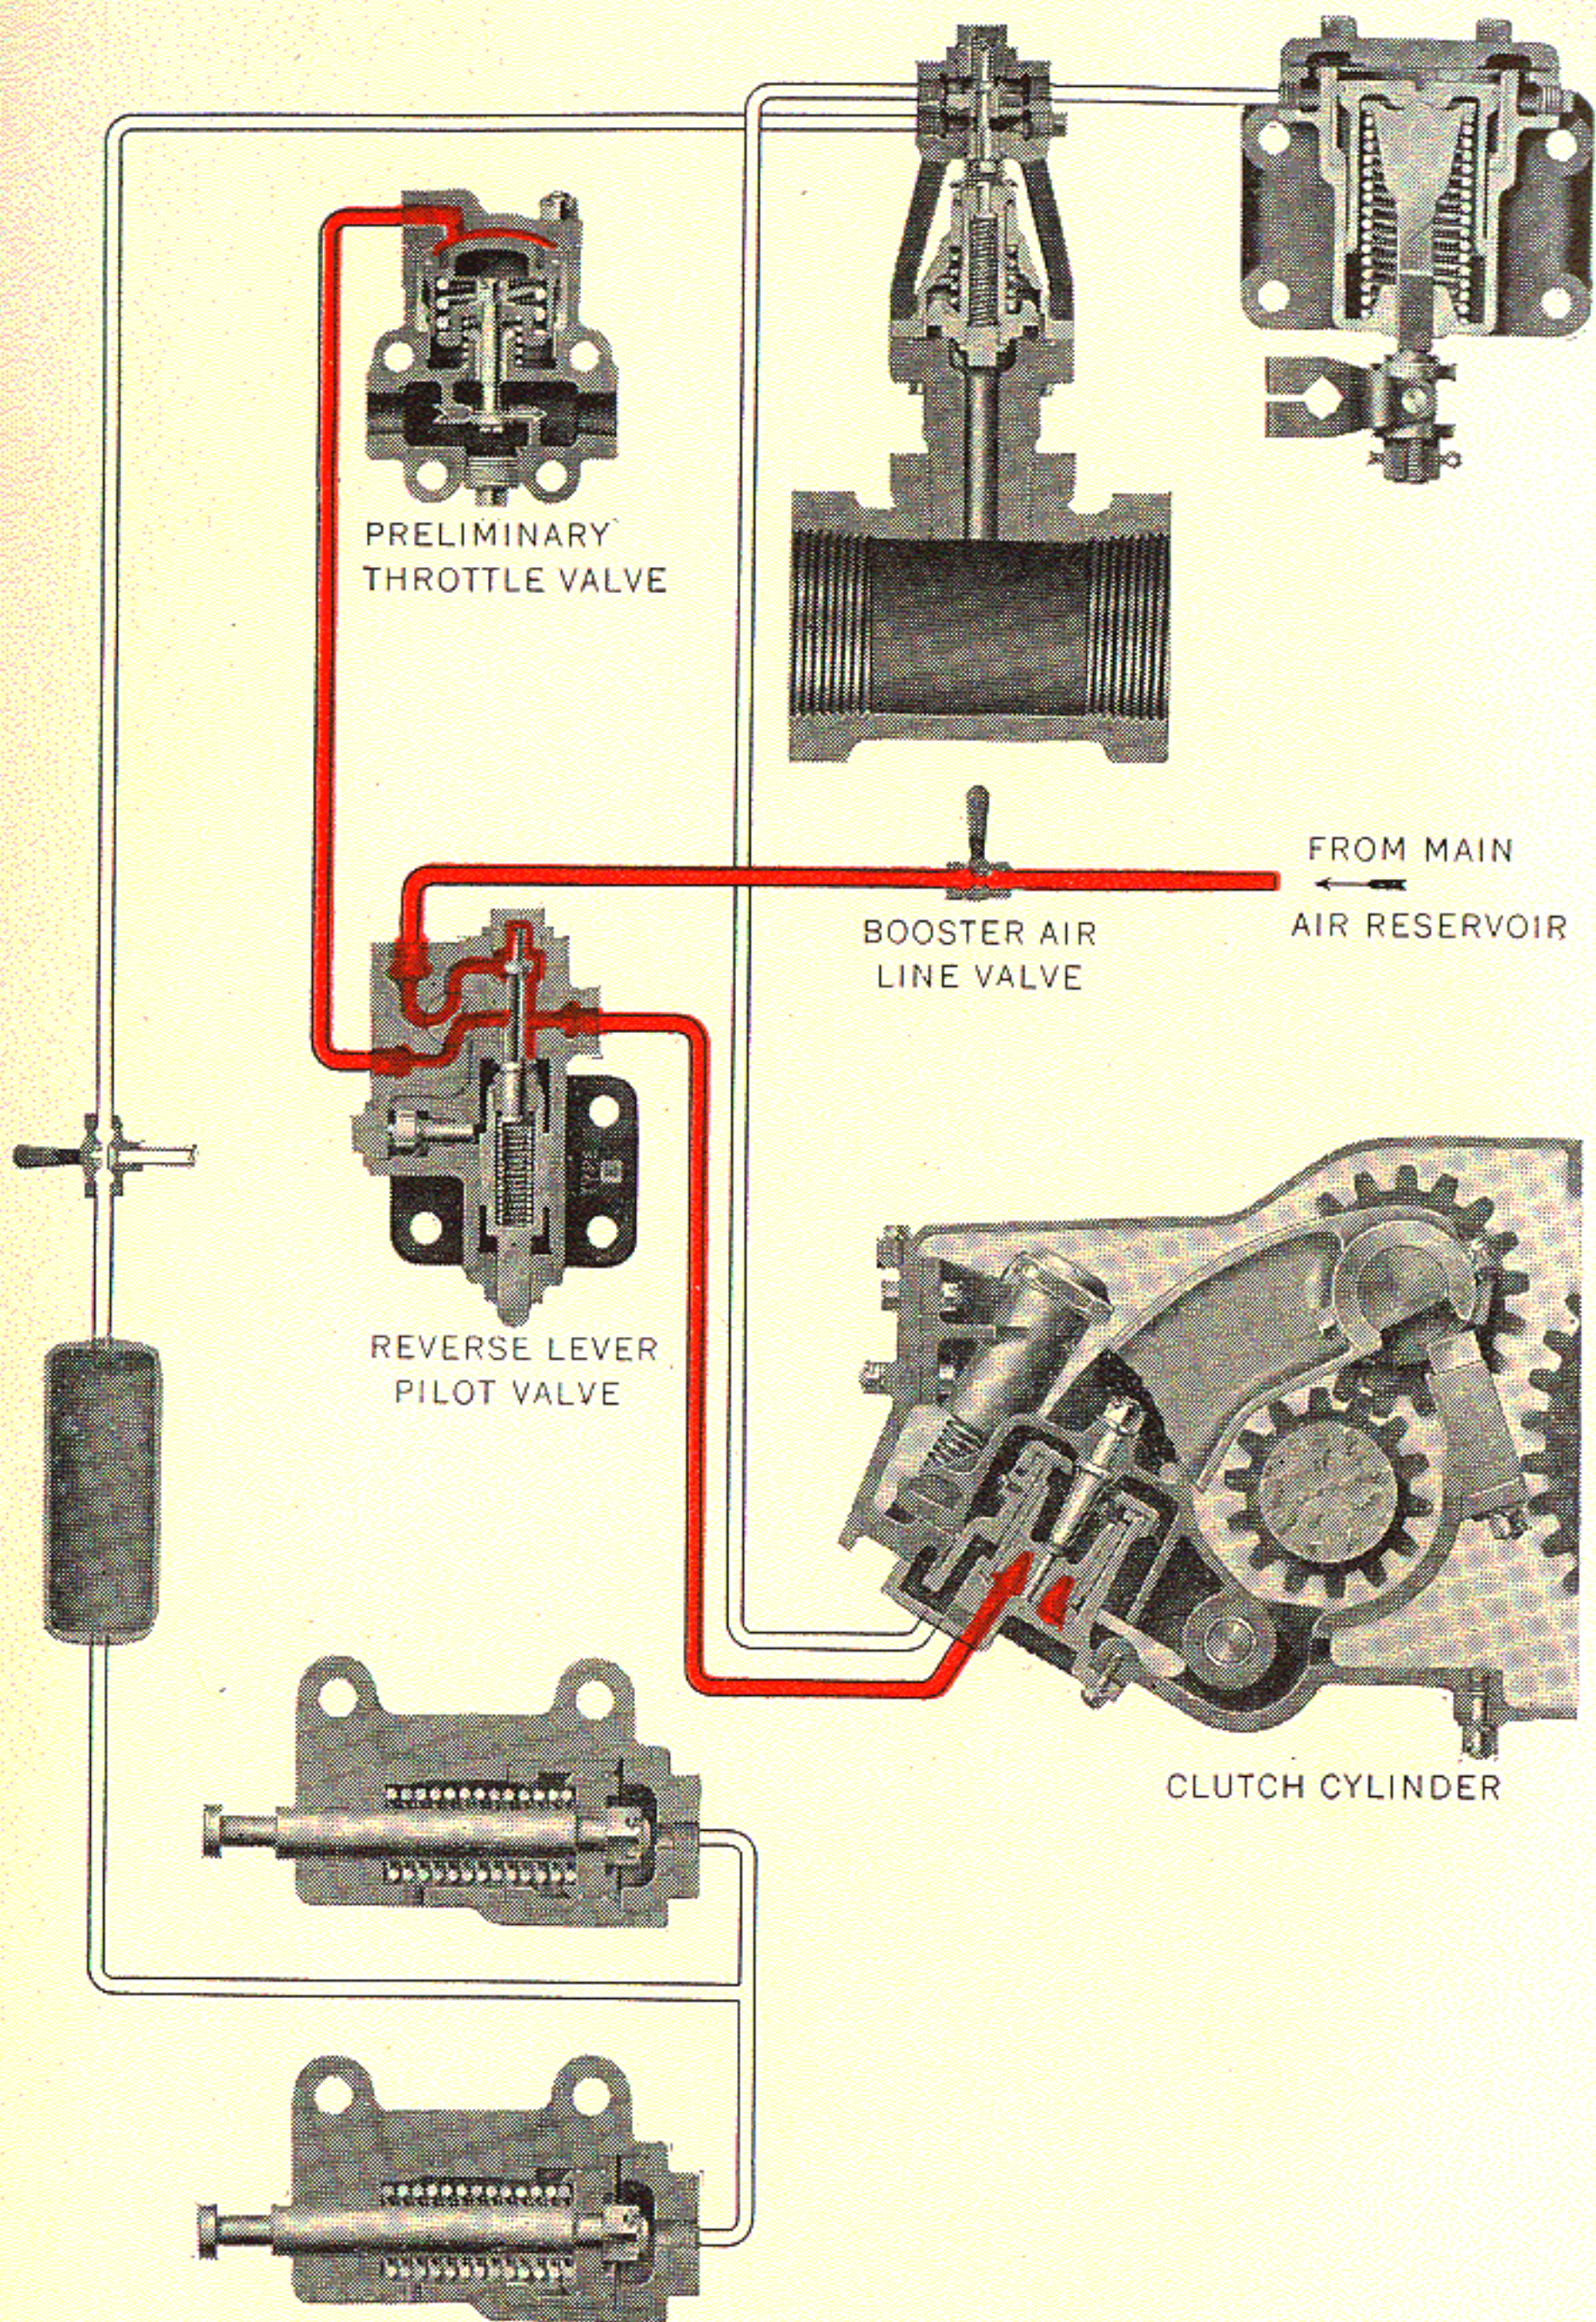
Reverse Lever Pilot Valve Has Been Operated. Air Has Reached Preliminary Throttle Valve and Clutch Cylinder
